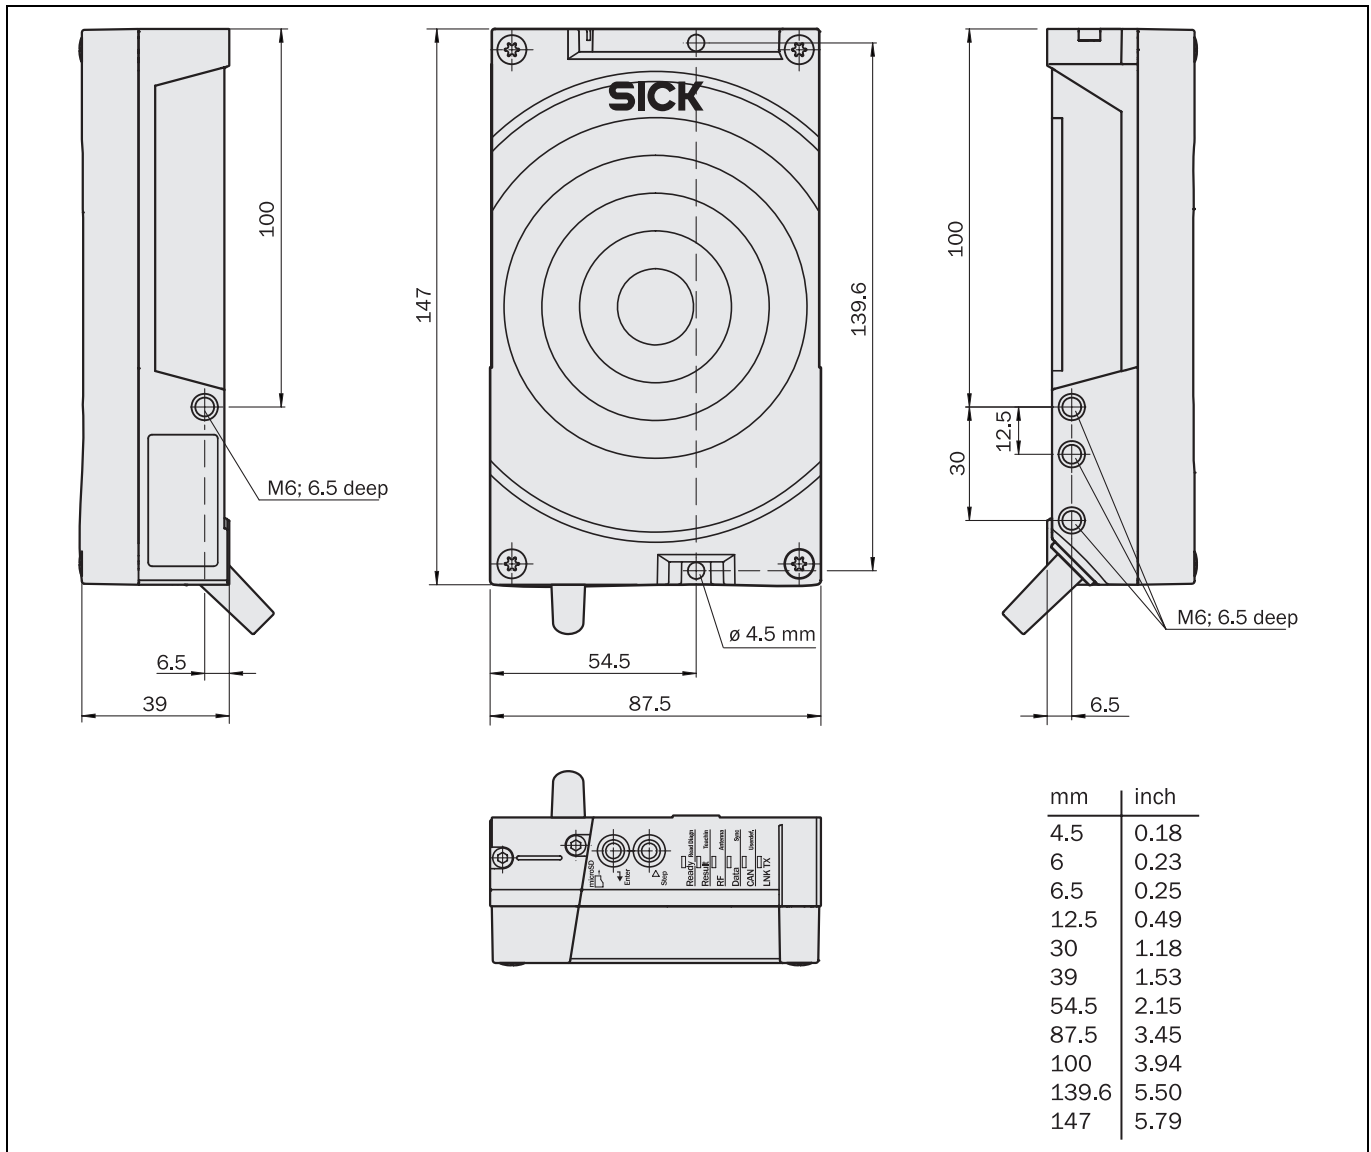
Standard version: Dimensions of the interrogator (RFH620-1000001)
